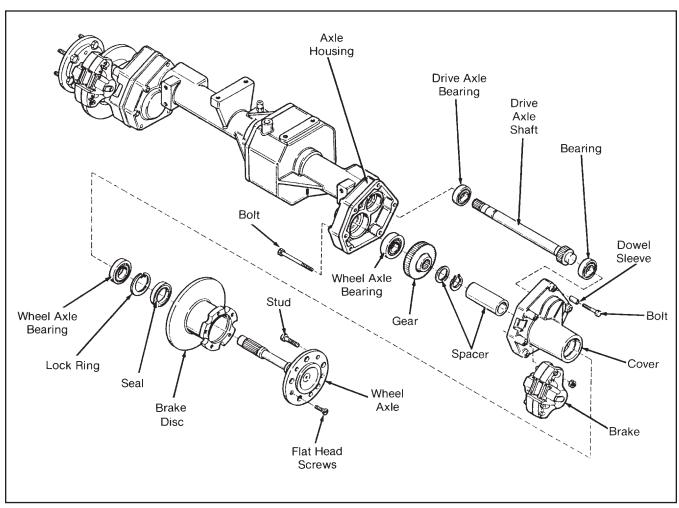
E-6. Reduction Gear and Drive Axle Disassembly
